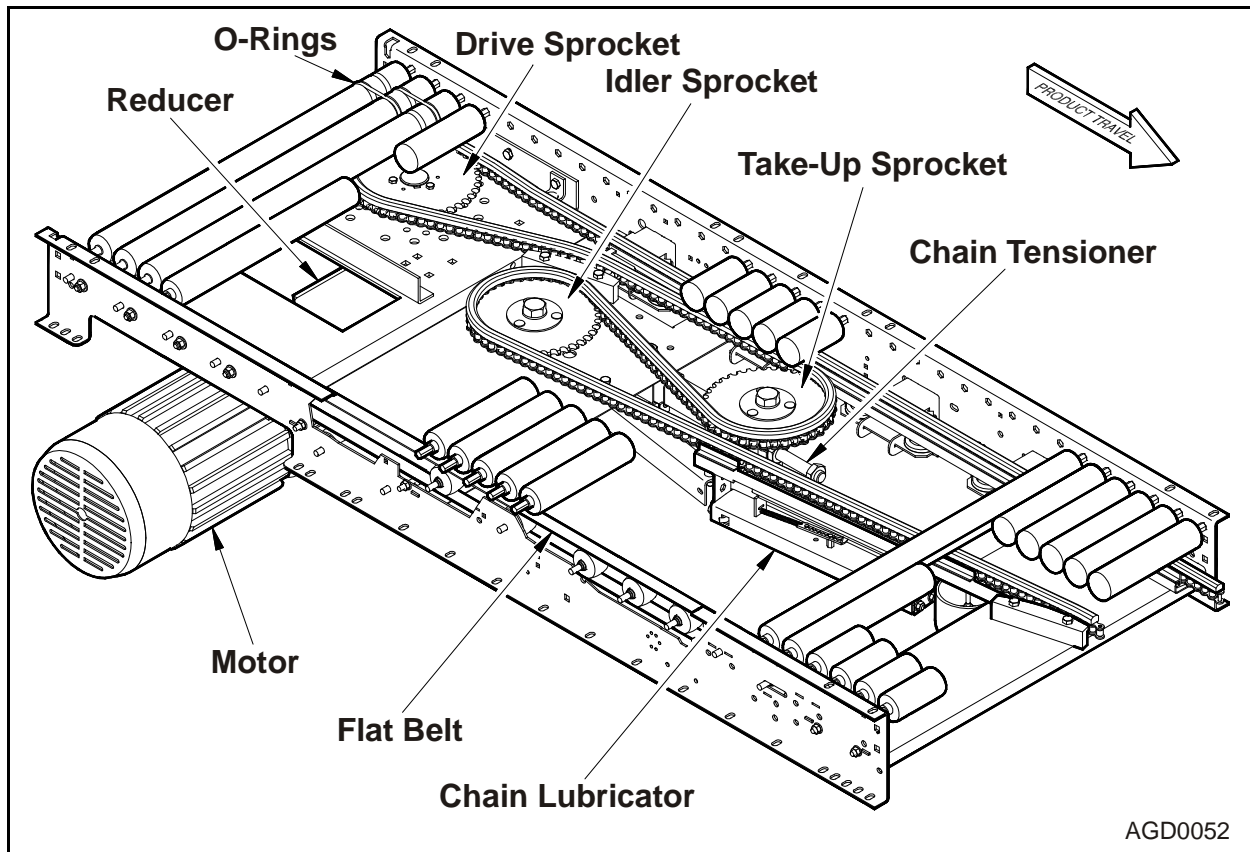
2 Infeed Drive Section (LH Assembly Shown)
